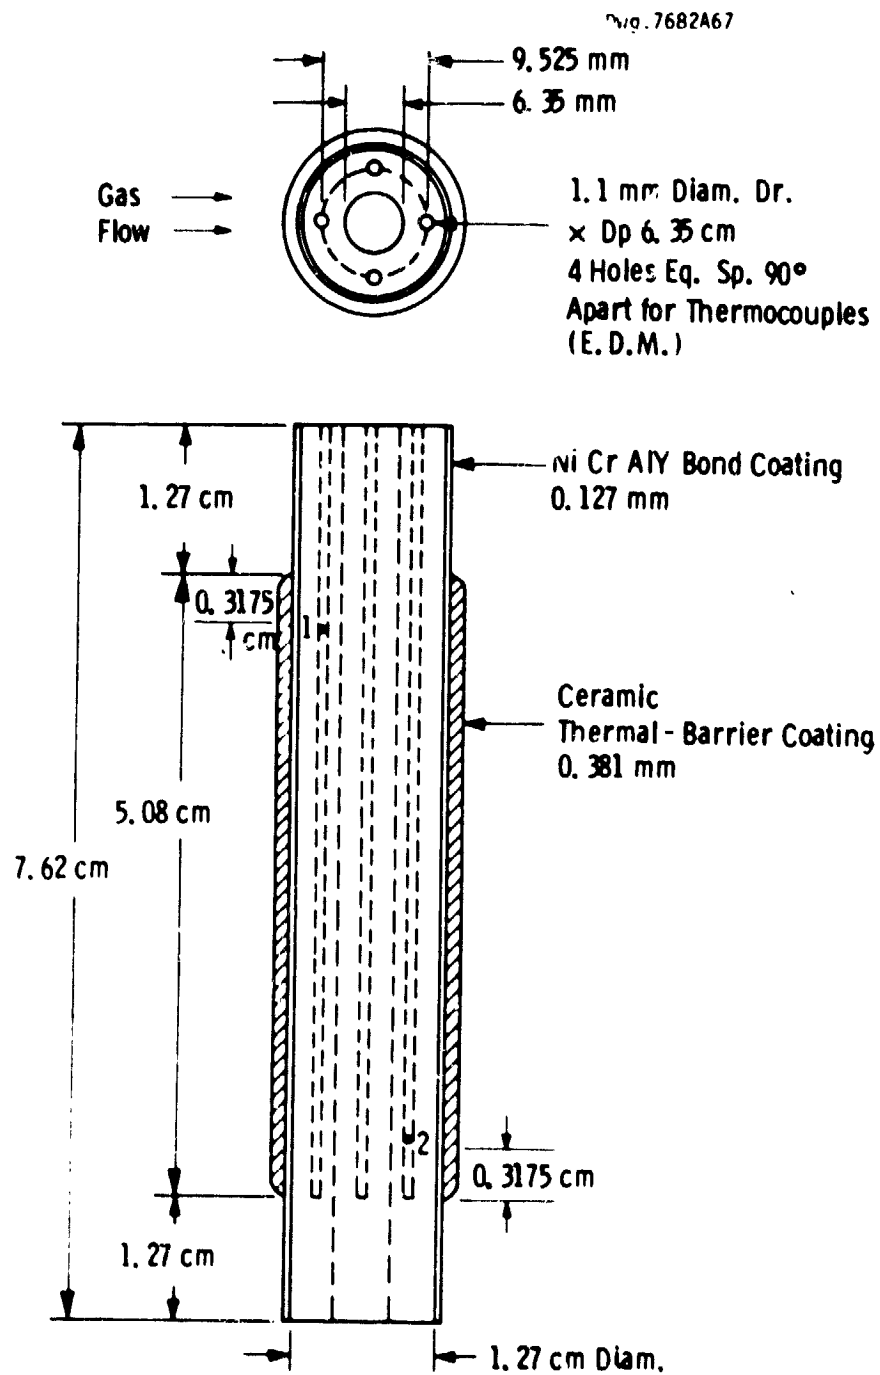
Thermal-barrier coating test specimen showing location of thermocouples
